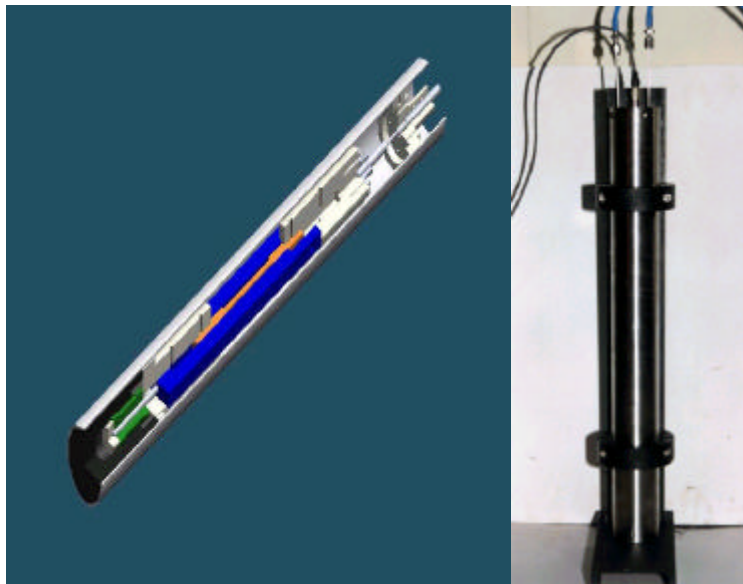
Quarter view of in-pile creep assembly and photo of its mock-up
